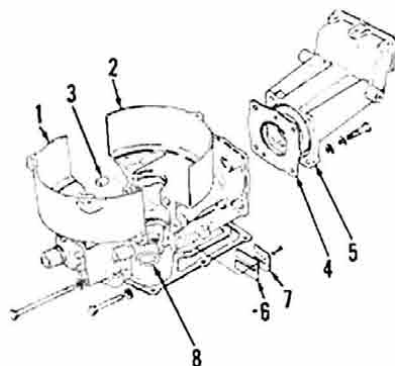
Exploded view of crankcase and cylinder assembly.
